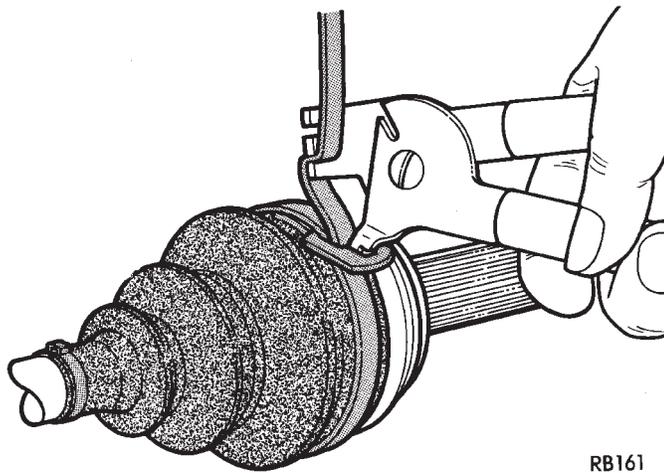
Push Tool Forward & Fit into Buckle Eye
